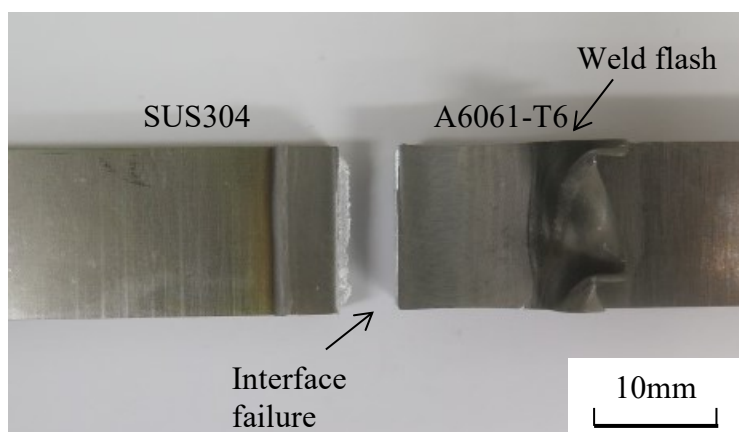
Macroscopic top view of tensile-fractured tailored blank.
